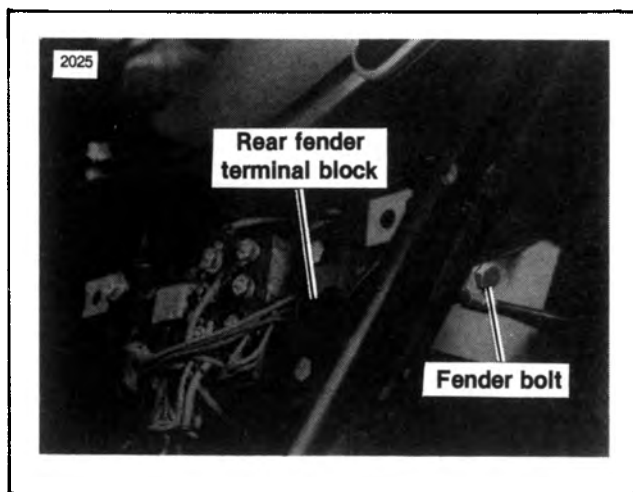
Rear Fender Bolt and Terminal Block — FXR
